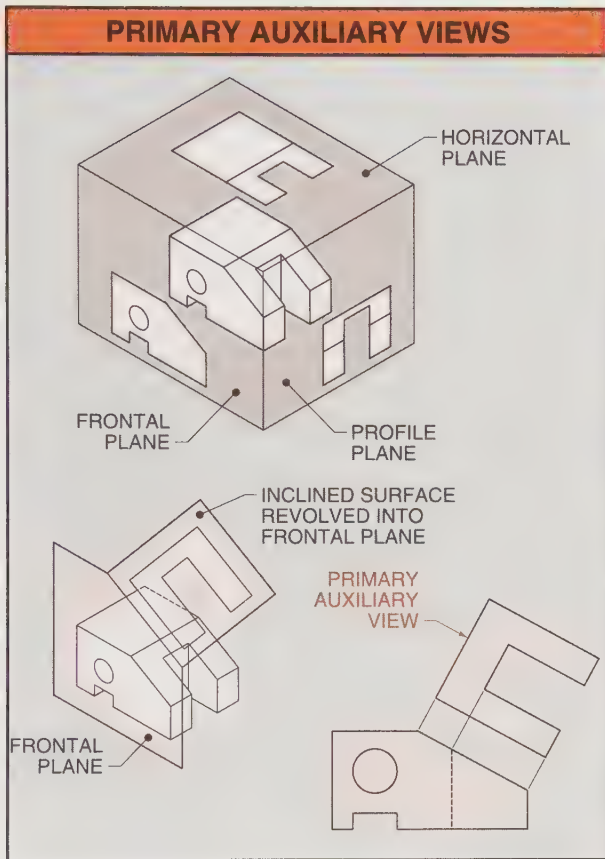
A primary auxiliary view is perpendicular to one plane and inclined to the other two.
